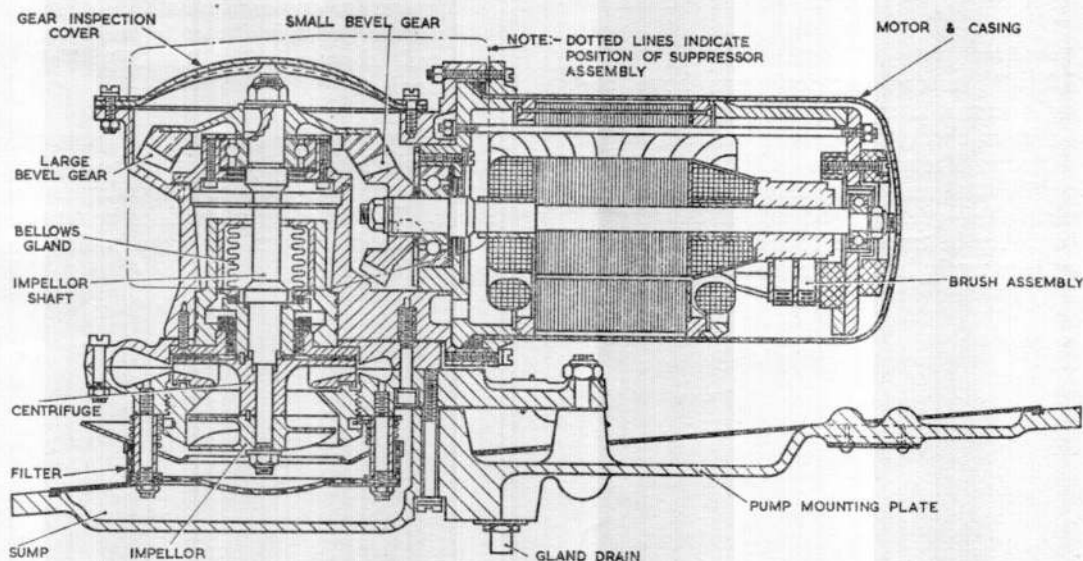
Sectional view of inclined bottom sump mounting type fuel pump with right angled drive
